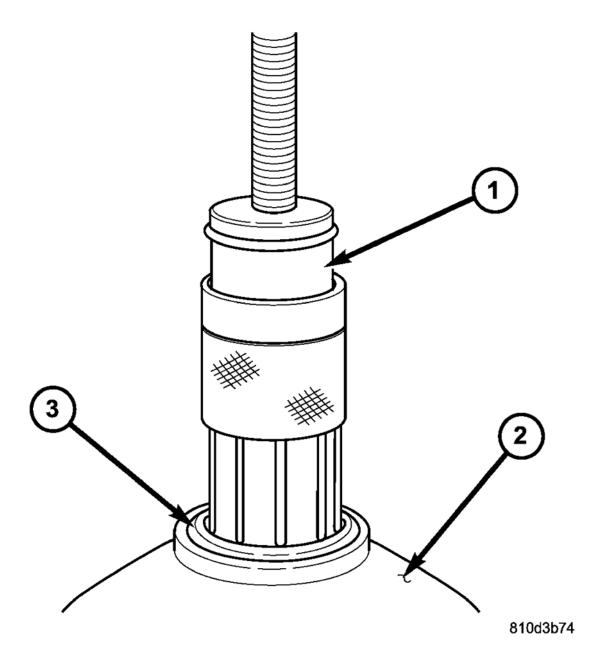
Bearing Remover 9082, Transmission Case & Output Shaft Bearing Courtesy of CHRYSLER LLC
